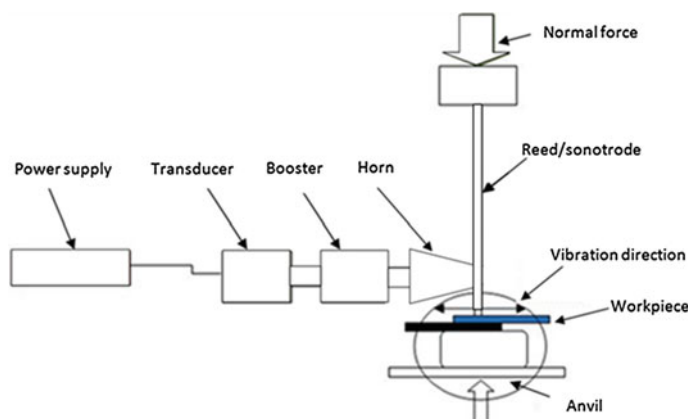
Principle of ultrasonic welding set up
